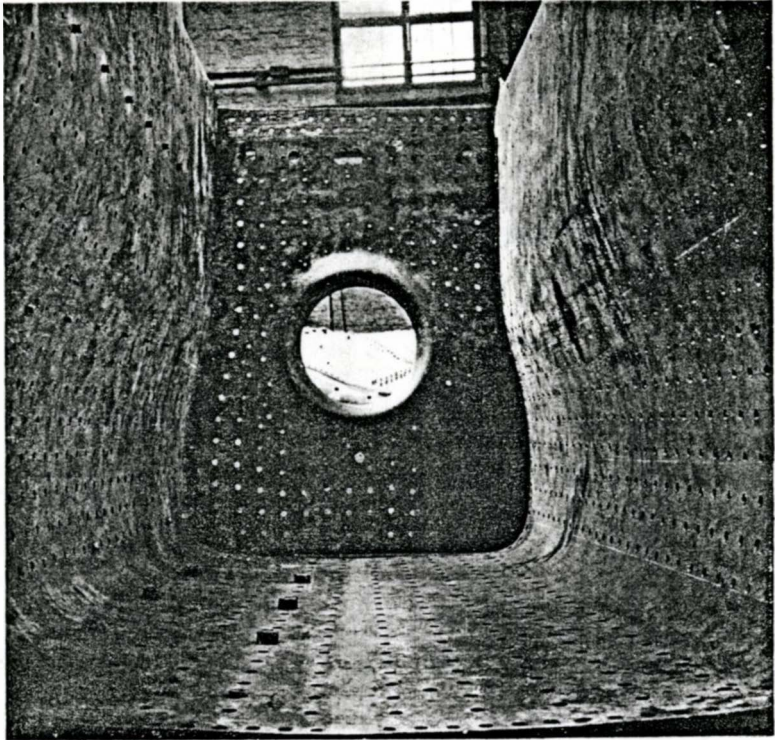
Locomotive firebox. A completed and dressed weld in the crown of a replacement copper box. (By courtesy of the Railway Executive.)
